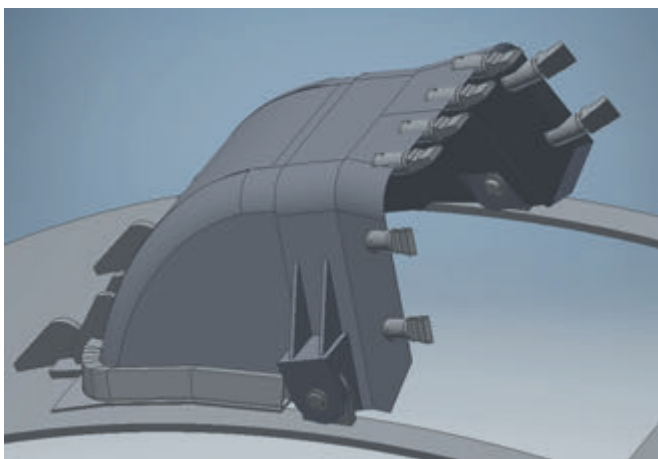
Prototype of bucket for hard mineable soils in BWE SchRs 4600 [12]
